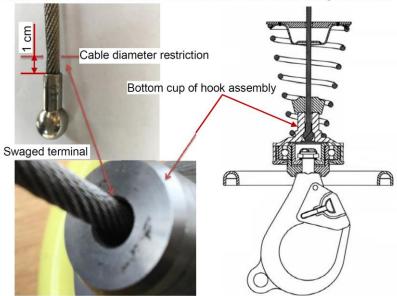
Cable diameter restriction located at edge of bottom cup of the hook assembly.
